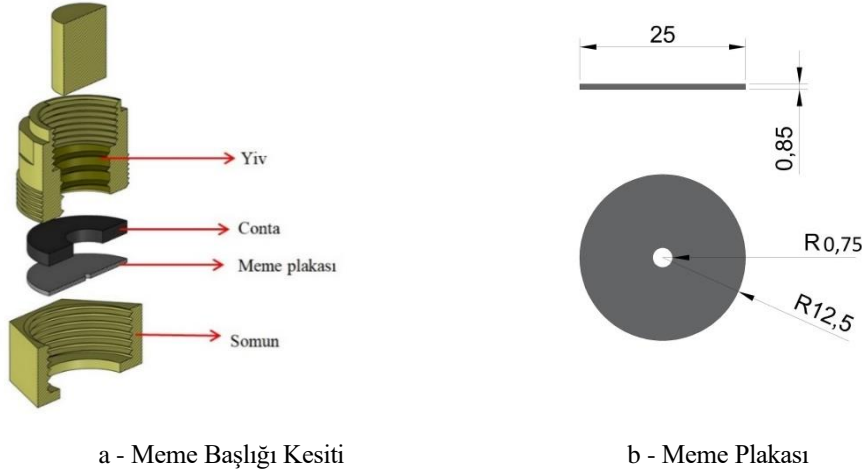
Section of hollow cone nozzle and technical dimensions of nozzle plate
